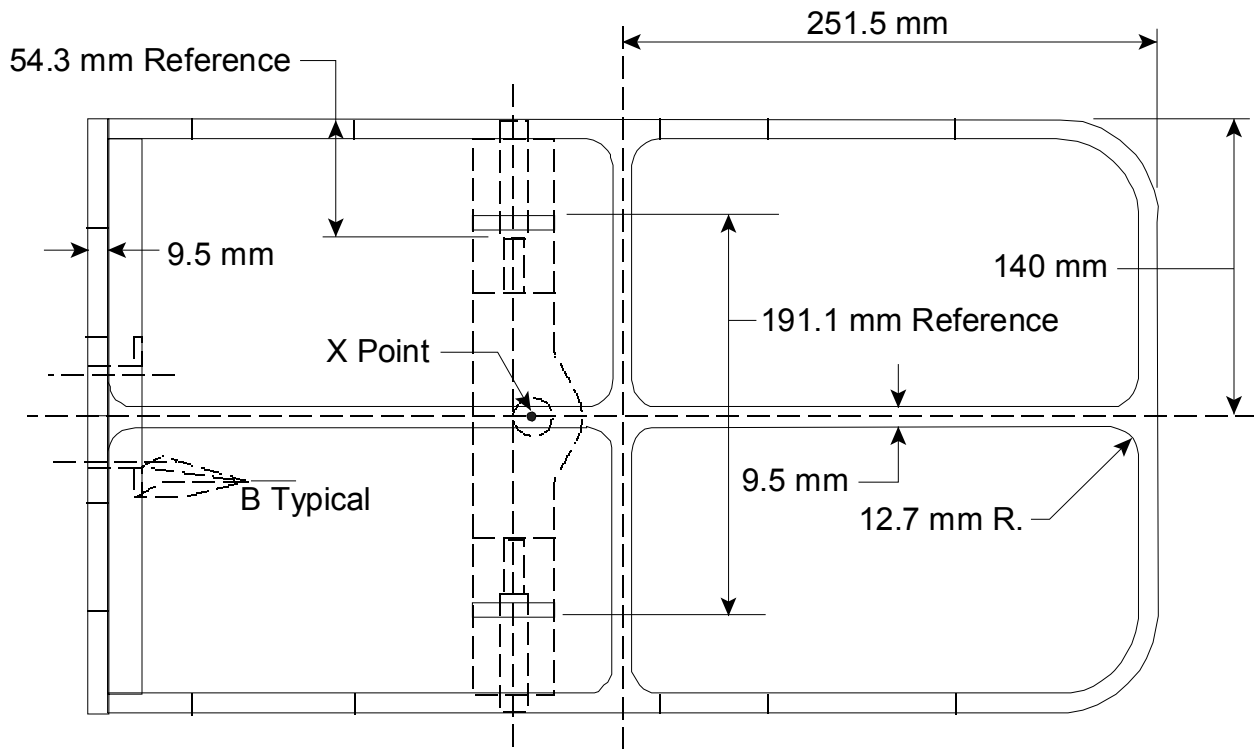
Plan View, Static Force Application test Device 1 (SFAD 1)
